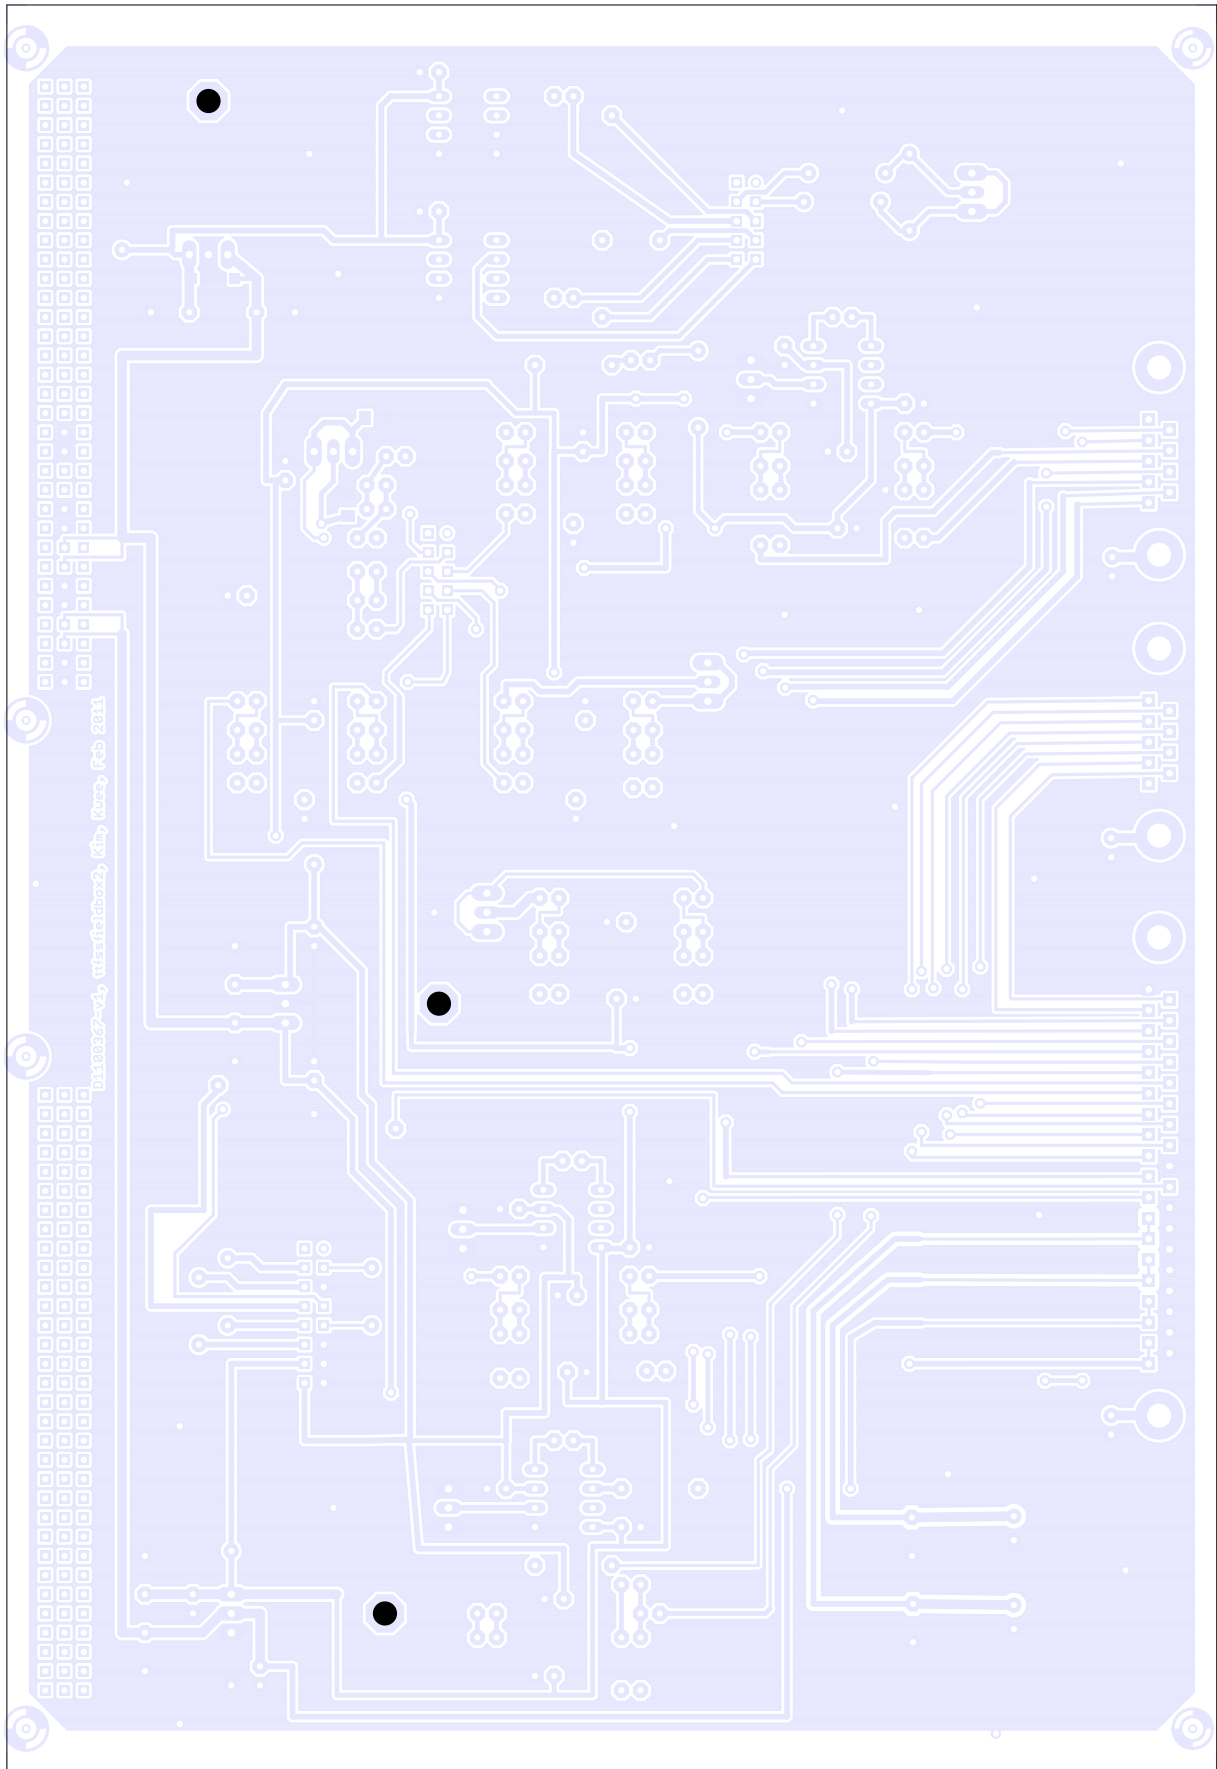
Board bottom view showing drills with 3.2 mm (0.126 in) diameter
